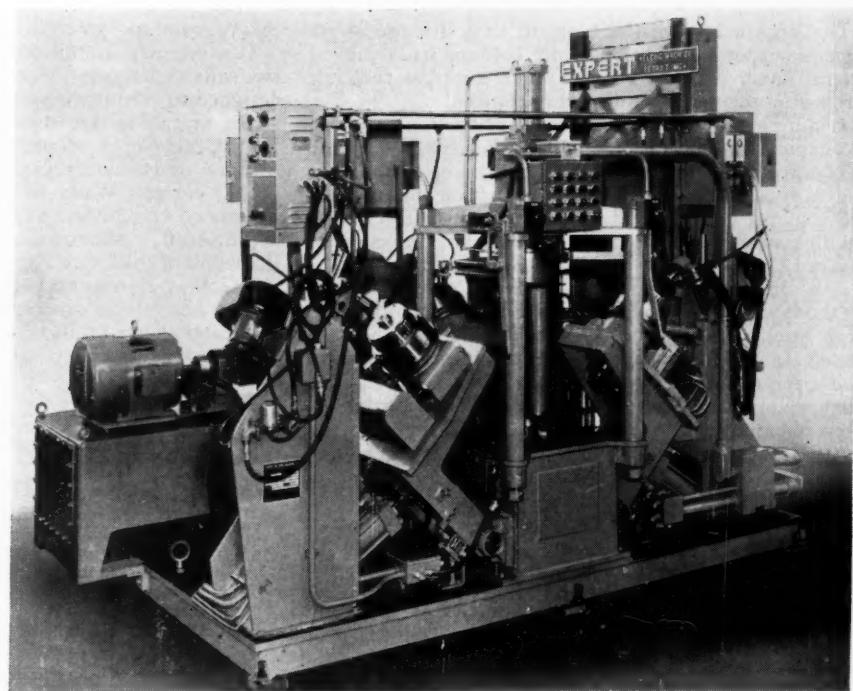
Automatic welding head for hidden or submerged arc welding
